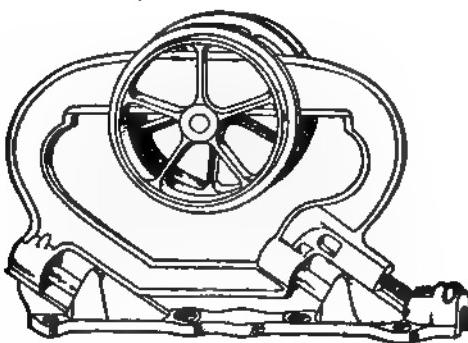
Pioneer Wood-Track House-Door Hanger.
